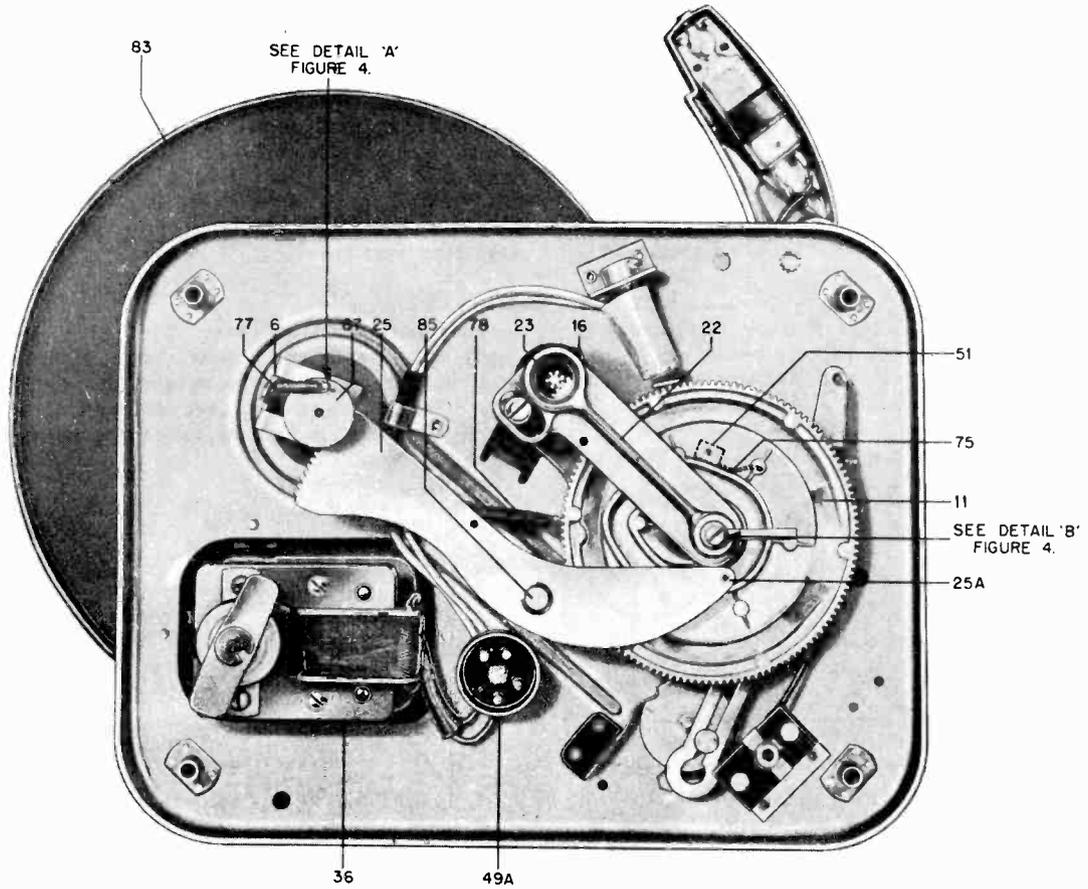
PARTS LOCATION - BOTTOM - COMPLETE
